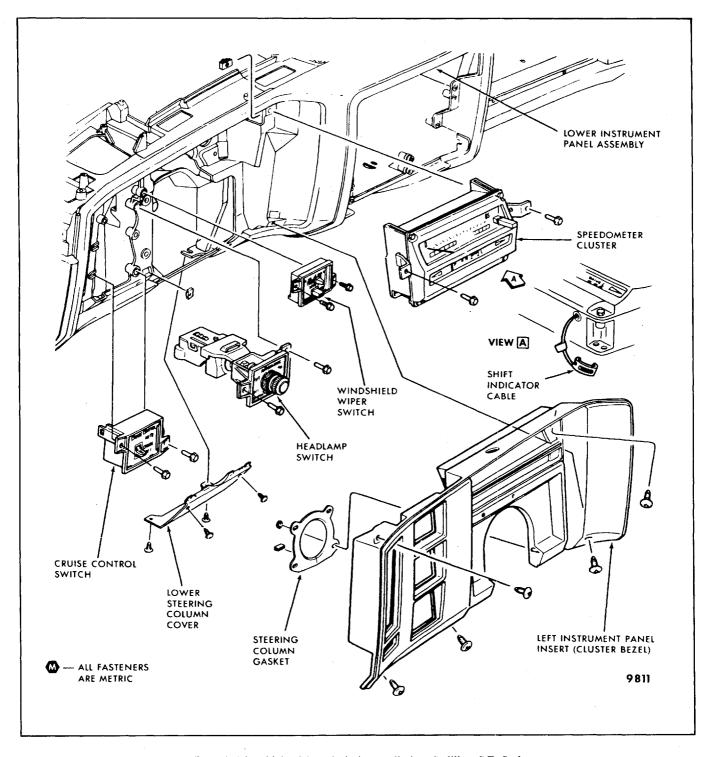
Windshield Wiper Switch Installation Cadillac C,D Styles
